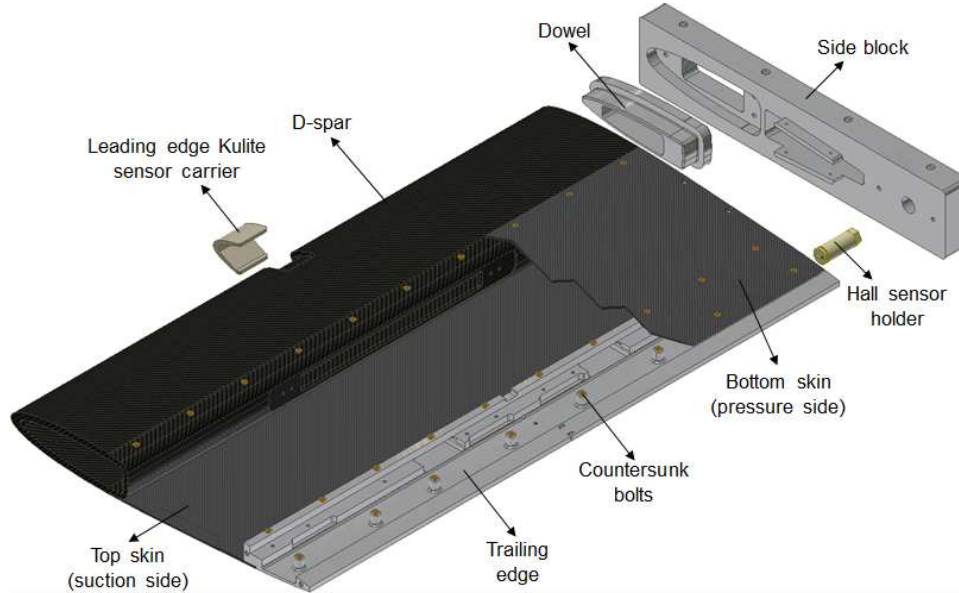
Exploded view of the blade aerofoil section without the AGF mechanism.
